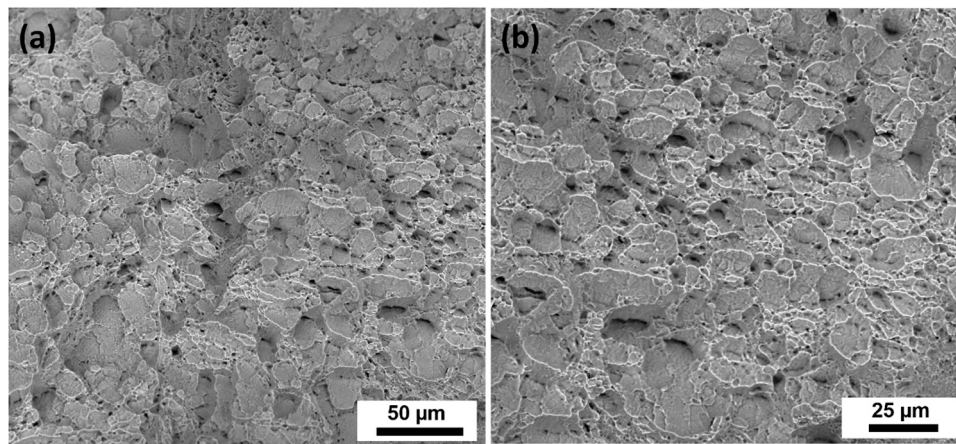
The Fracture surface of the tensile tested Ti-7Cr-4Sn observed under (a) x500 magnification and (b) x800 magnification. The fracture surface is covered with dimples of different sizes. Such a fracture surface is generally formed due to shear deformation under sliding mode, which suggests a ductile fracture of the material
